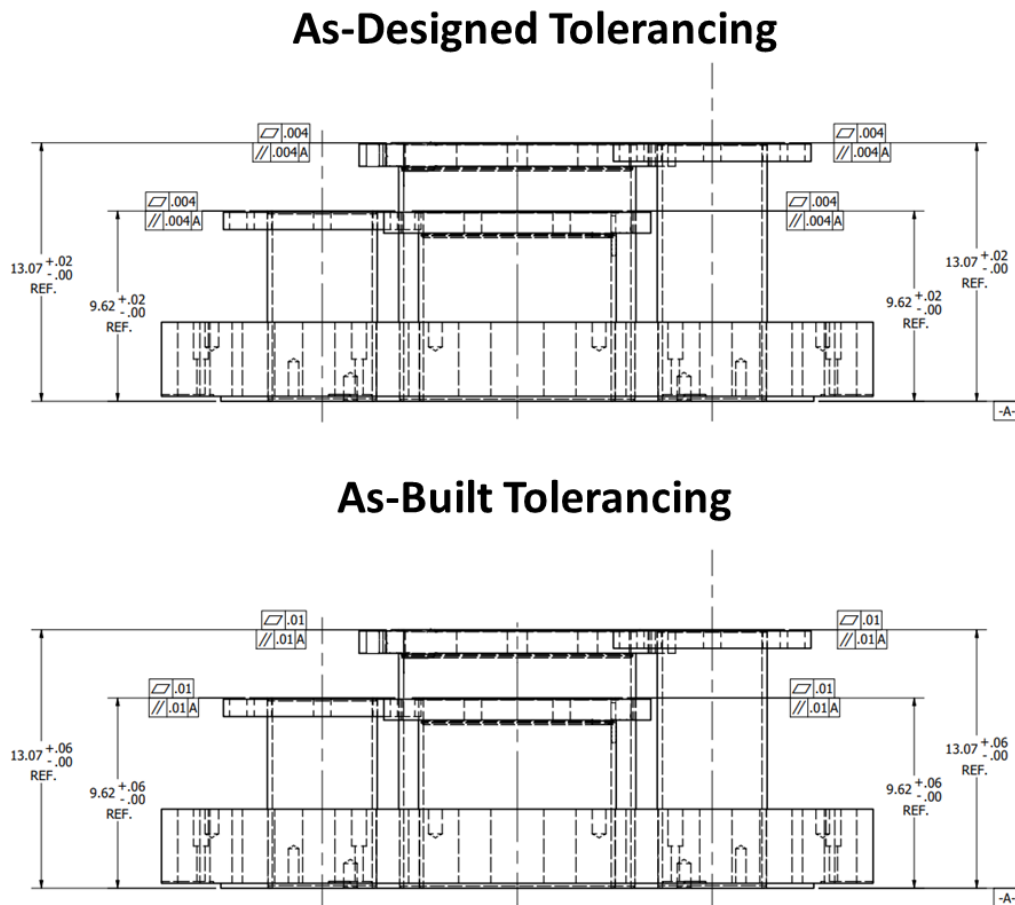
Dimensions and tolerancing of the Main Flange Weldment. The as-designed tolerancing was found to be too restrictive for the manufacturer. Therefore, the tolerances were increased. This will likely have little impact on the final assembly as none of the sub-flange components need precise alignment at the bottom of the vessel.
